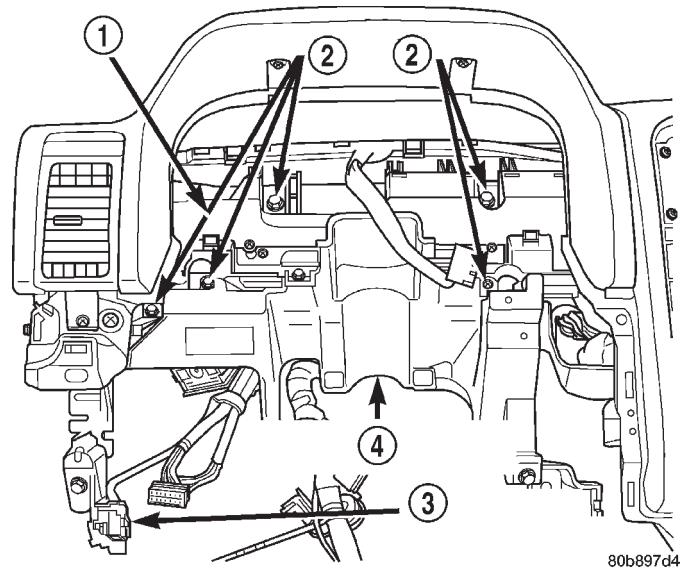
Instrument Panel Steering Column Support Bracket Remove/Install
